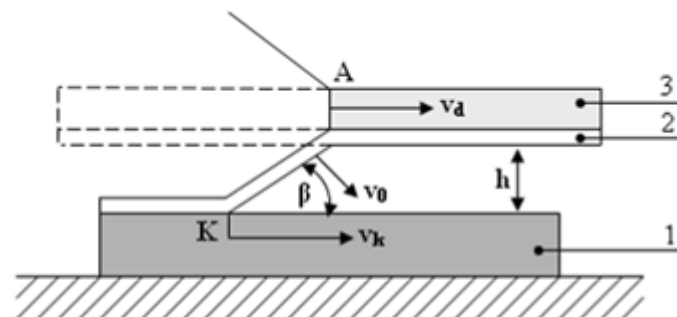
Parallel way of assembly of welded materials [2]
